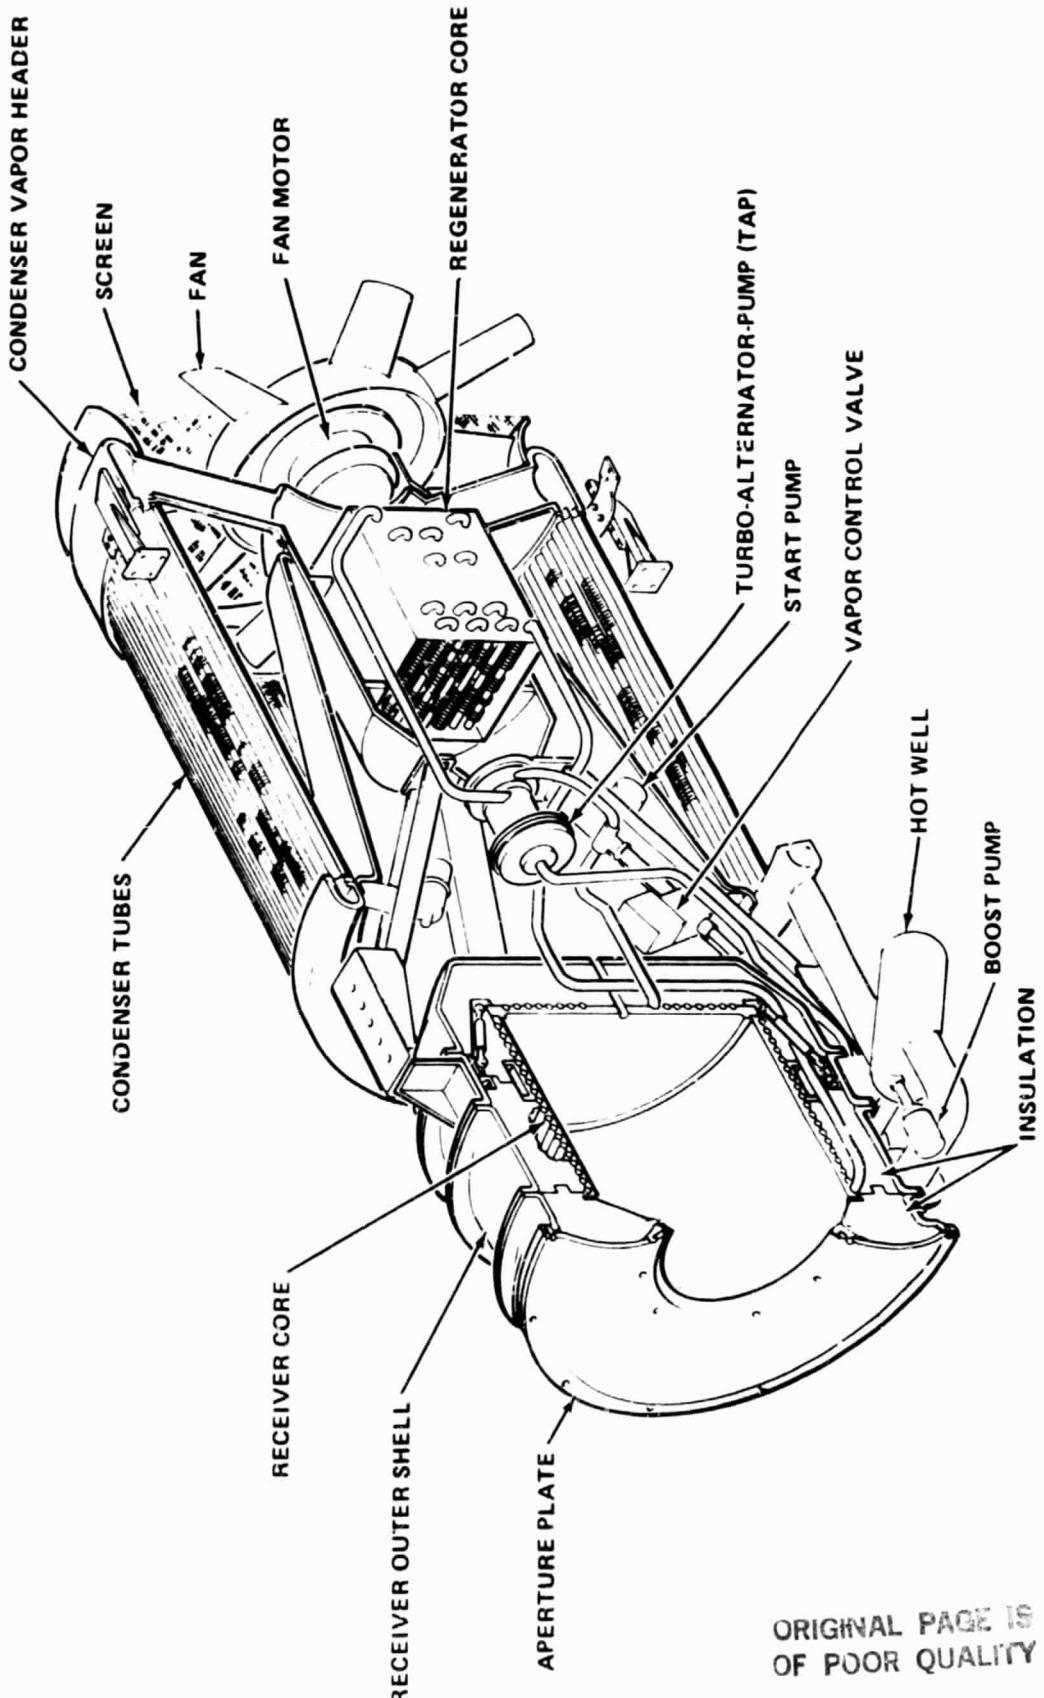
POWER CONVERSION ASSEMBLY (PCA)
